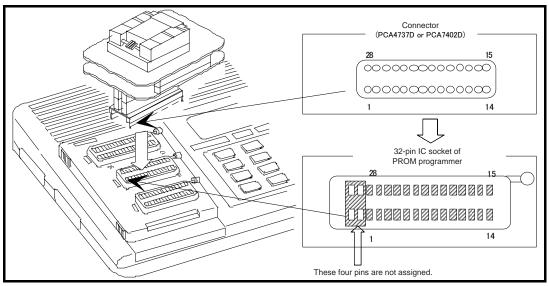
Attaching the adapter to a PROM programmer (PCA4738D or PCA7402D)
